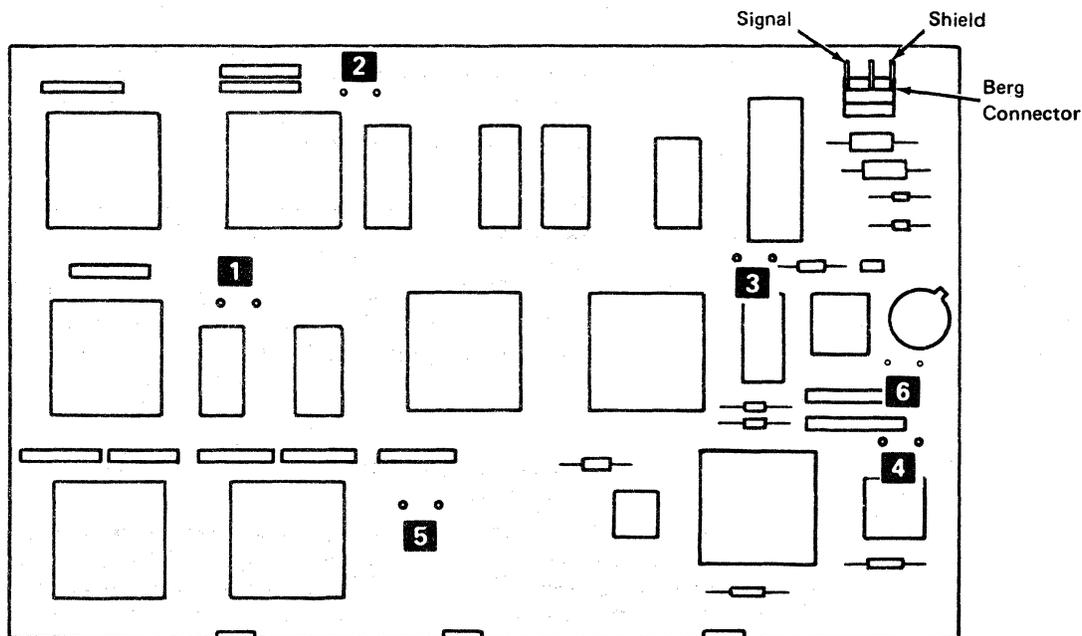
3271/3272 Driver Card Jumper Locations
